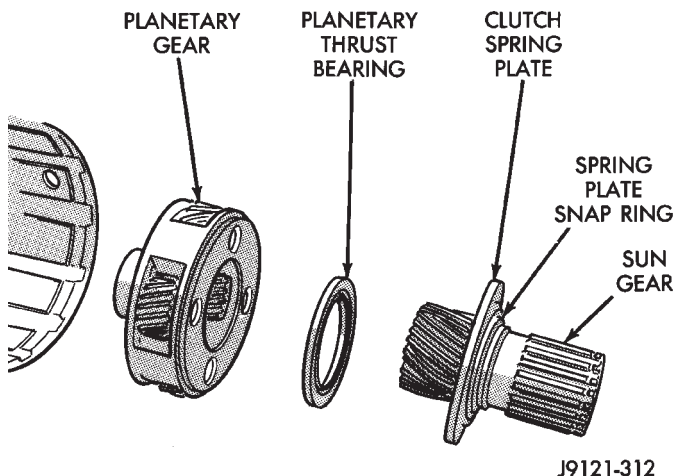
Removing Sun Gear, Thrust Bearing And Planetary Gear
